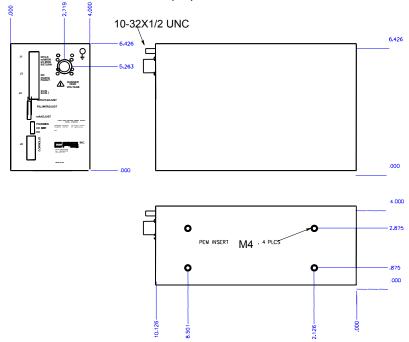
XPS50P50 STANDARD DIMENSIONS
